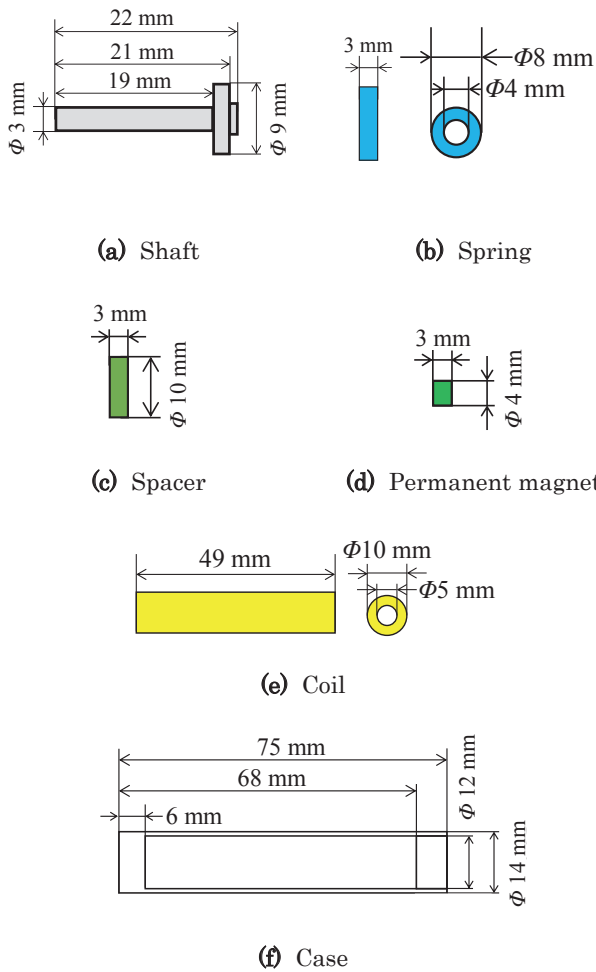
Dimensions of each part of the giant magnetostrictive actuator.
